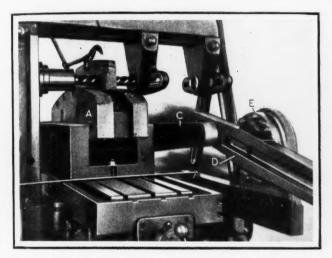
Fixture Used in Milling the Curved Slot in Locomotive Radius Links
